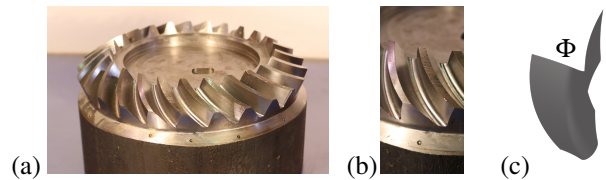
(a) Spiral bevel gear (5-axis CNC machined using the proposed methodology). (b) A zoom-in to one tooth space (aka “valley”) between two teeth and its CAD model that is formed by a doubly curved free-form surface Φ (c).
